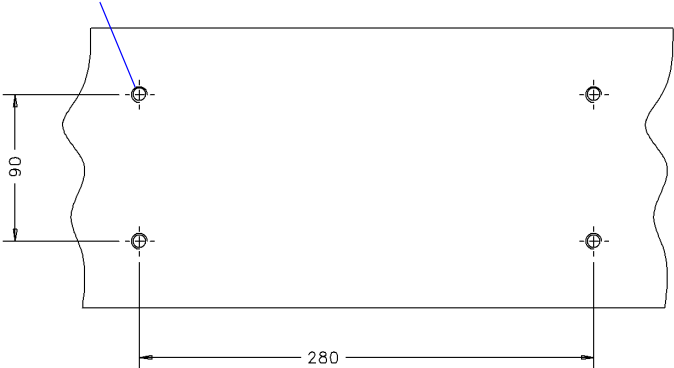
Series 5580 - Top Plate Mounting Dimensions
